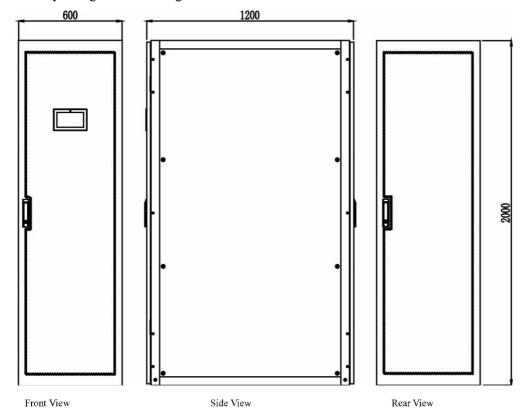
Exterior Dimensions of Indoor Unit 600 Wide Standard Model
